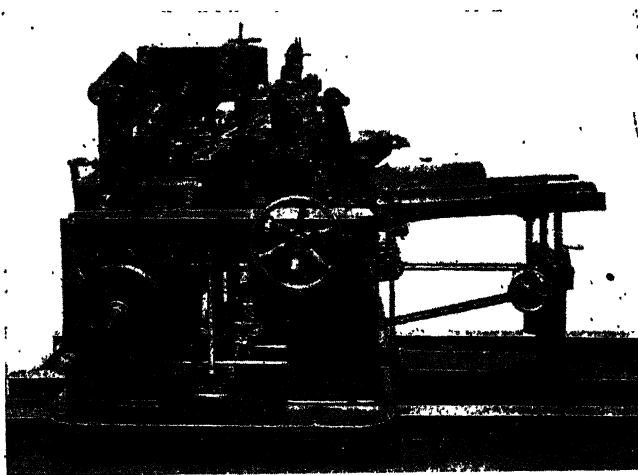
"MURRAY" ROUNDING AND JOINTING MACHINE.
